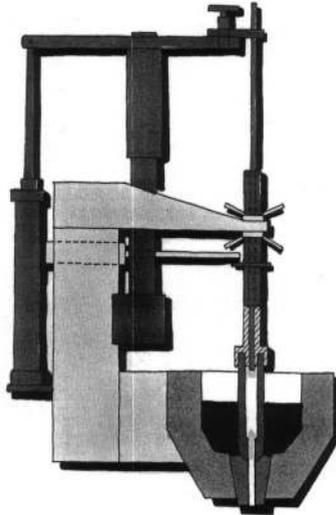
ABB stopper mechanism with patented pouring nozzle cleaning device
